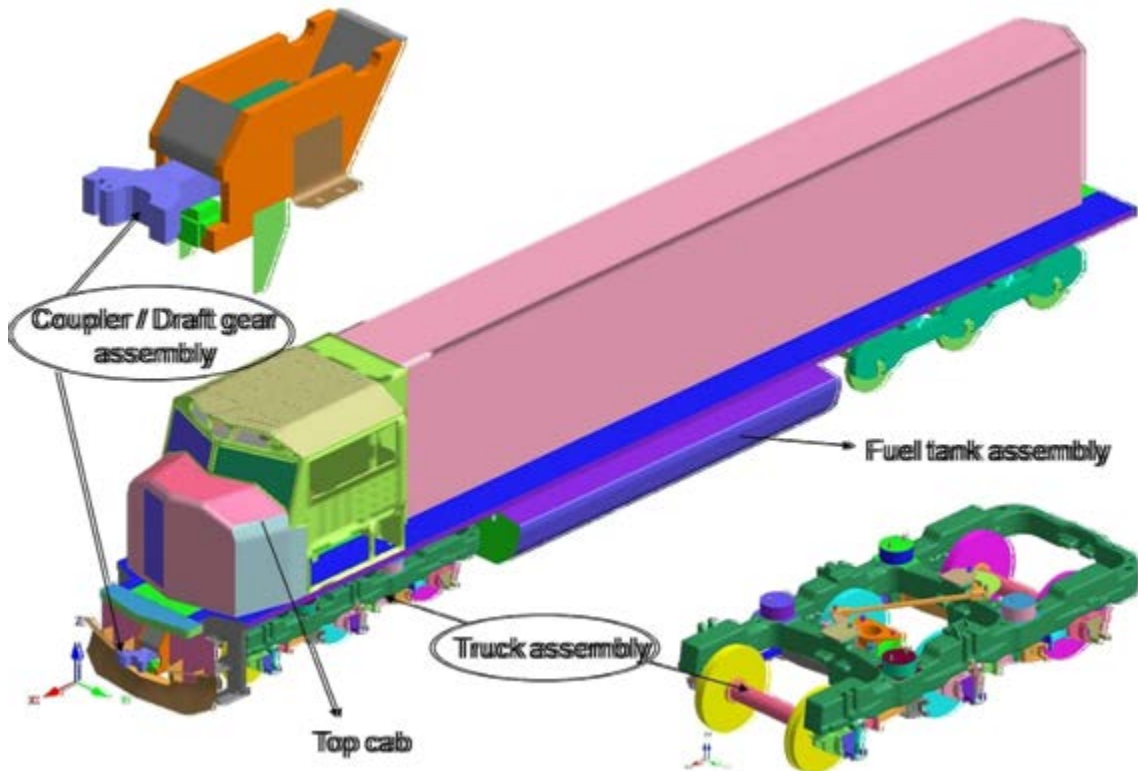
SD70MAC Model with Updated Coupler/Draft Gear and Steerable Truck Assembly
